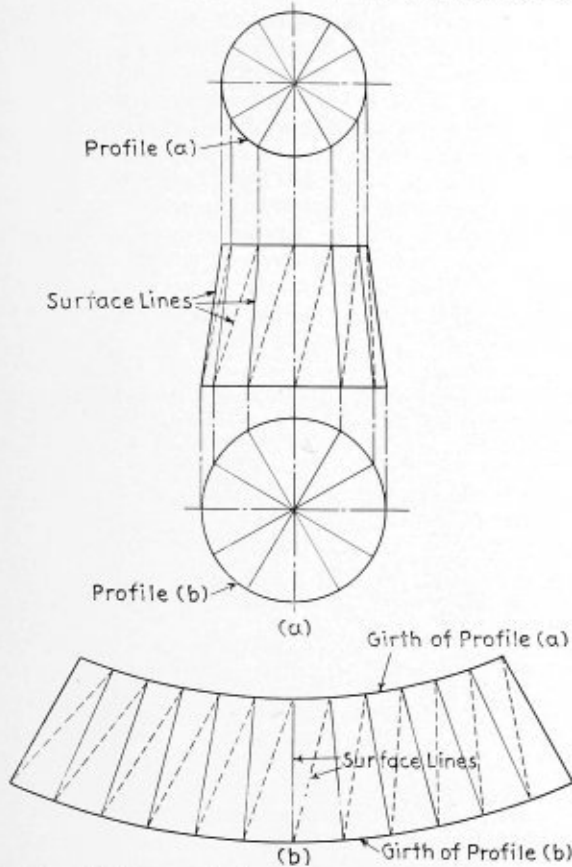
(a) Plan and elevation of object to be developed. (b) Pattern
